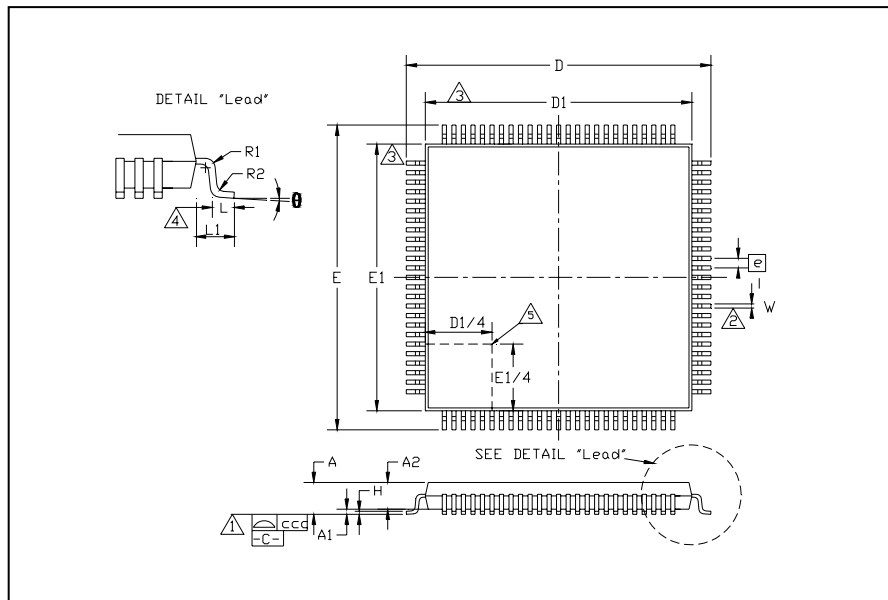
100 Pin TQFP Package Outline, 12x12x1.4 Body (Rev A)
